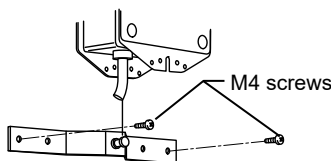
Installation of the actuator with forward rotation to min. 95 mm long shaft (2)
